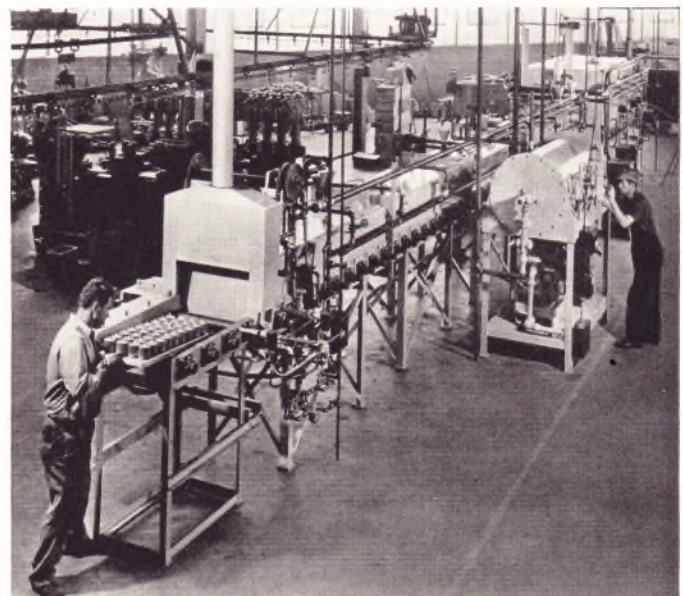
The tray at the discharge end of a roller-hearth furnace typifies the loading of small assemblies for brazing. At the right is a protective-atmosphere generator.
